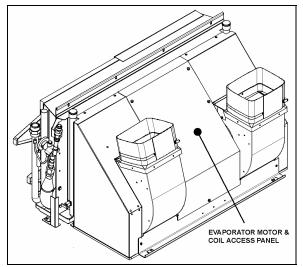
EVAPORATOR COIL ACCESS PANEL
